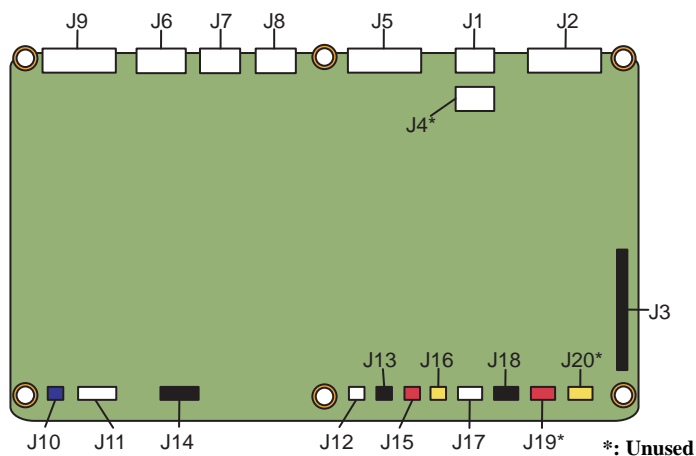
Connector Layout of the HEATER RELAY BOARD ASSY
